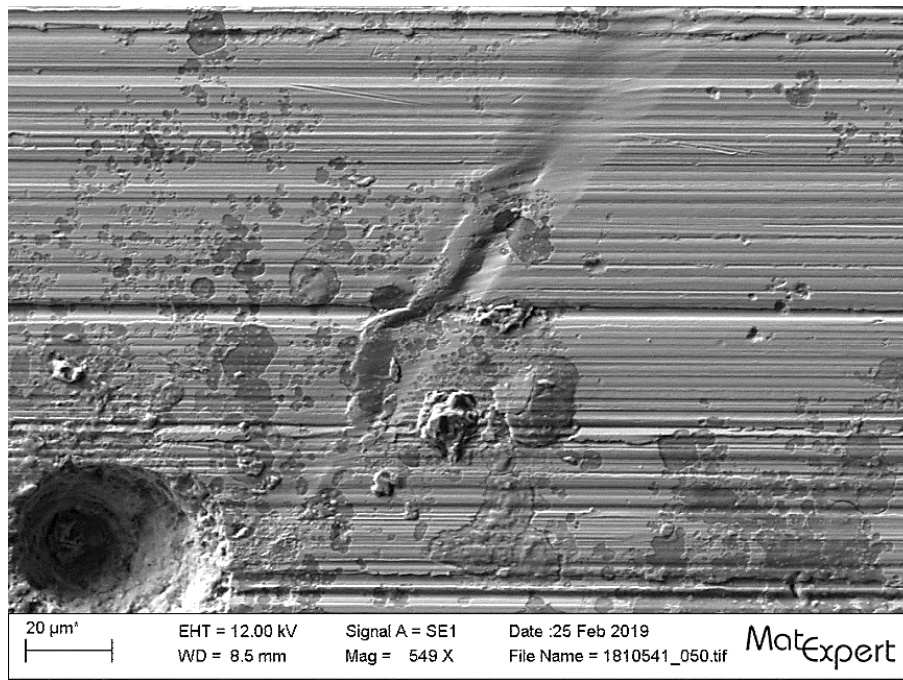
Ball bearing from the left engine, inner-race bearing track – pitting and indentation.
